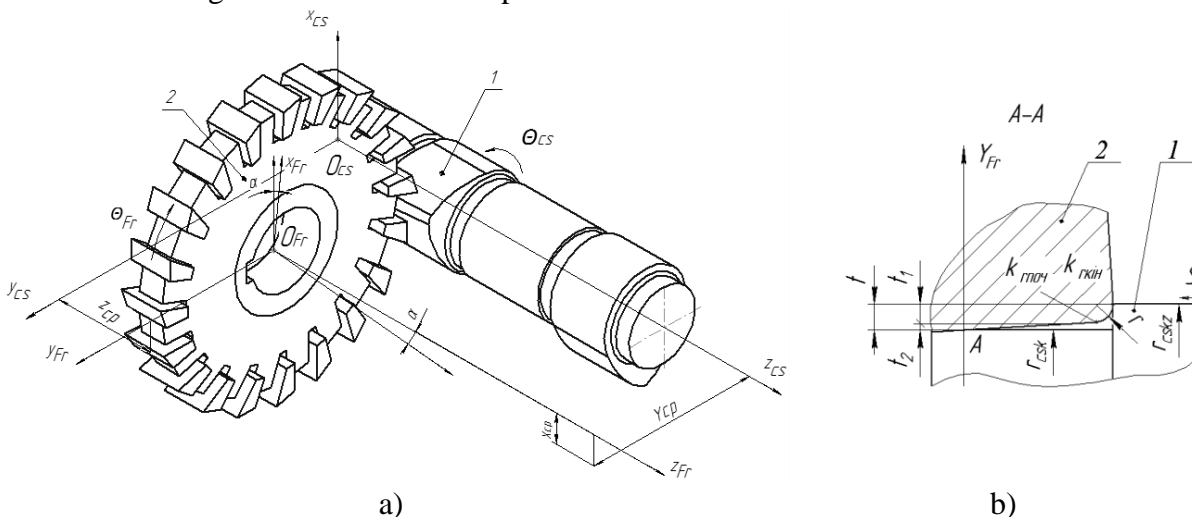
Scheme of milling cam camshaft with crossed axes of the cutter and parts
